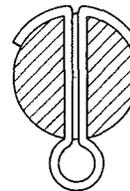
Method of Clinching Cotter Pin to Clear Wiring
